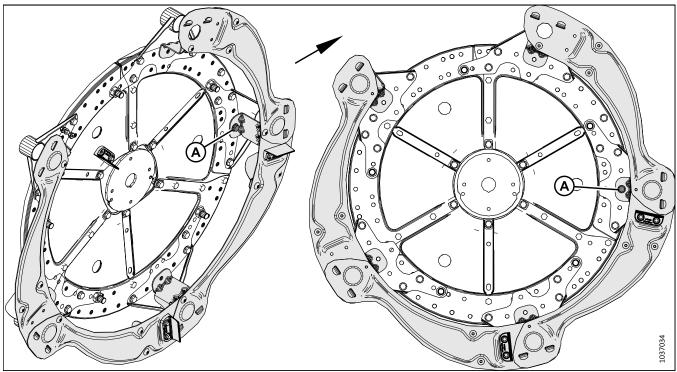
Five-Bat Reel – Partially Assembled Reel Endshields on Reel
